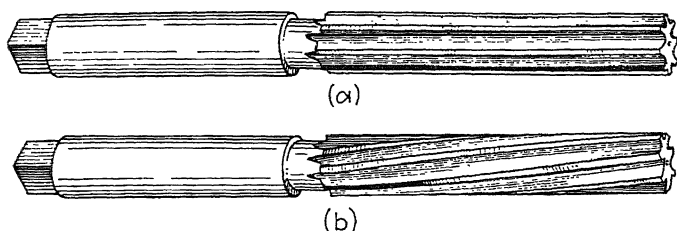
Hand reamers. (a) Regular; (b) with spiral teeth.
